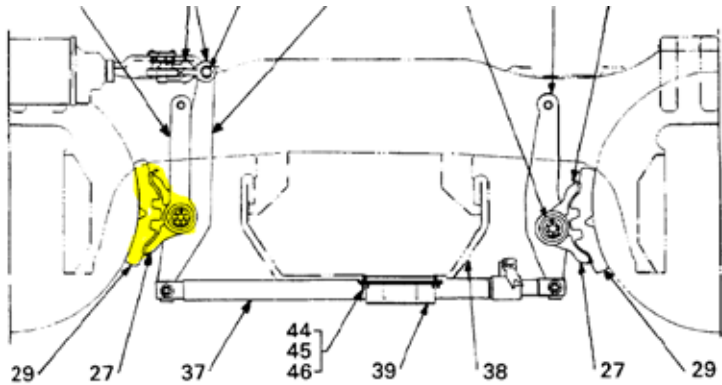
GP OEM Single Shoe, Live-Lever Brake Head Assembly location (steel ferrule with thermoplastic bushing)
